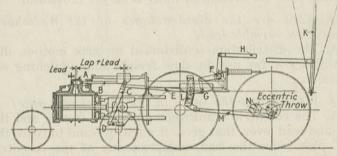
Walschaert Gear, Baldwin Locomotive Works.
